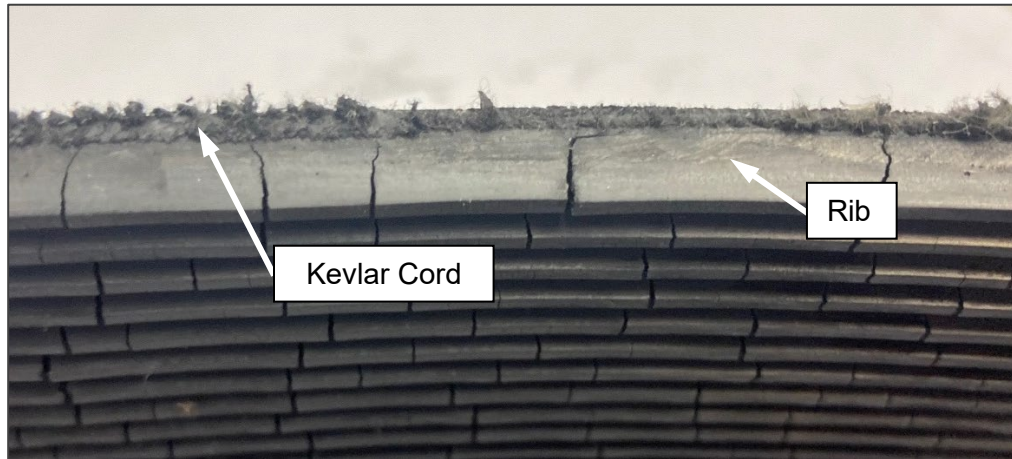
Drive Belt Visual Inspection – Edge Cord Fraying
